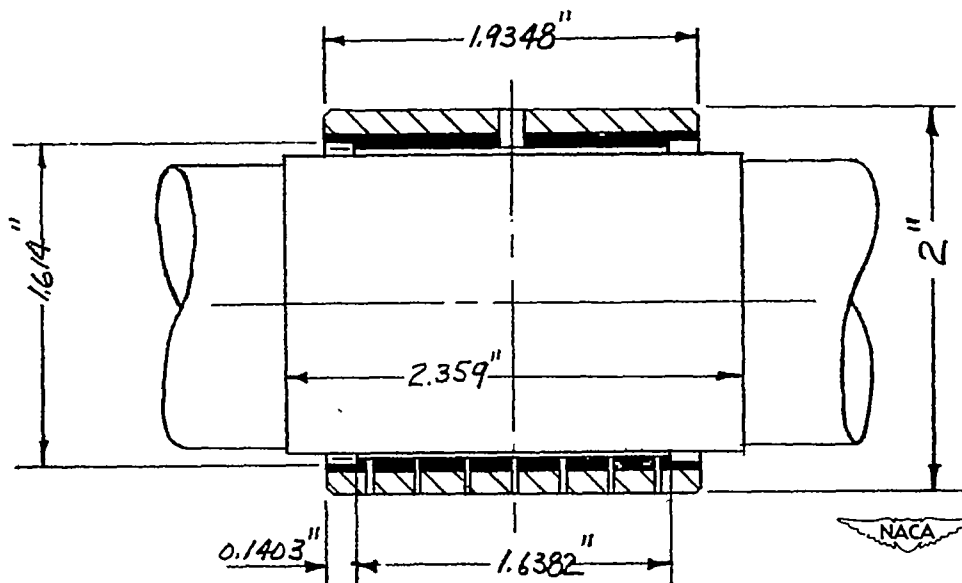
Location of oil inlet holes, pressure sampling holes, and thermocouples.
